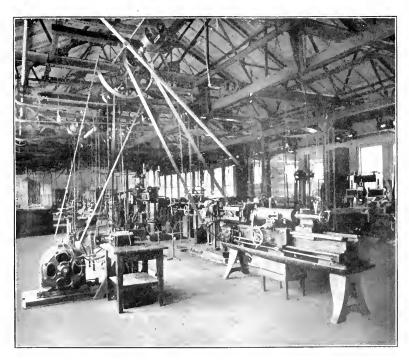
View in the University of Illinois Machine Shop showing location of Lathe and Motor drive used in Tests with High-Speed Tool Steels
